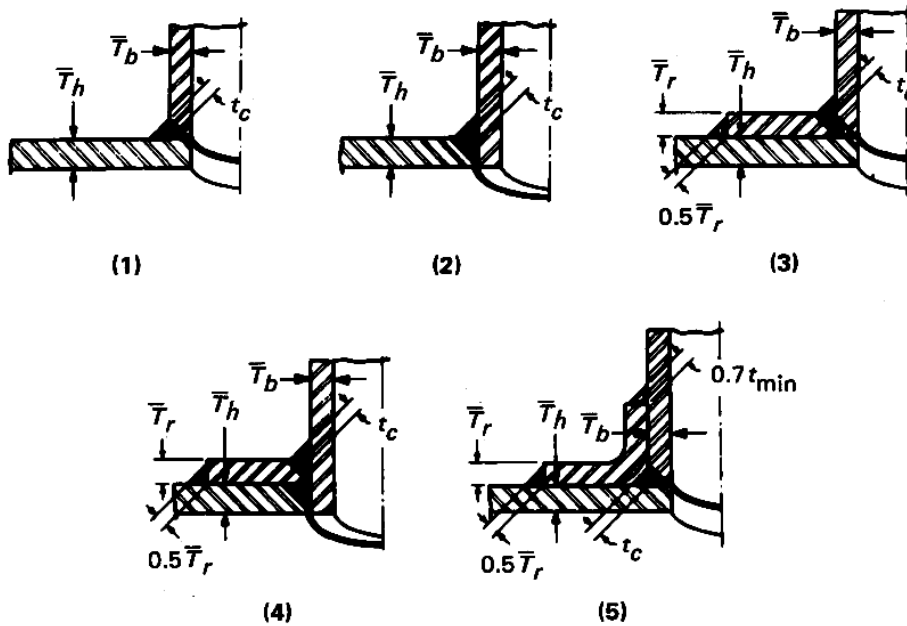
ACCEPTABLE DETAILS FOR BRANCH ATTACHMENT WELDS
